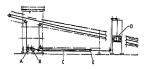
518 conveyor drive and gravity take-up arrangement.
